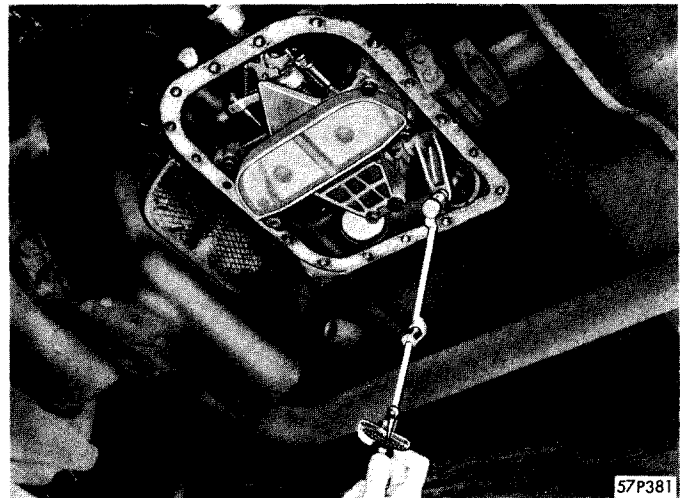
Adjusting Reverse Band Using Wrench C-3380
